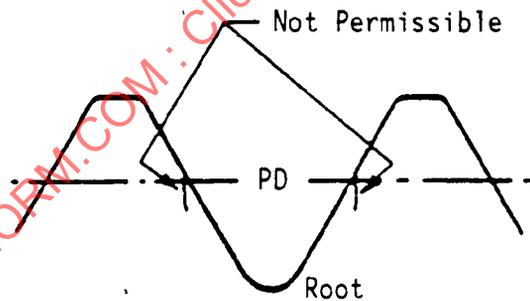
Laps Below PD Extending Toward Root, Rolled Thread
